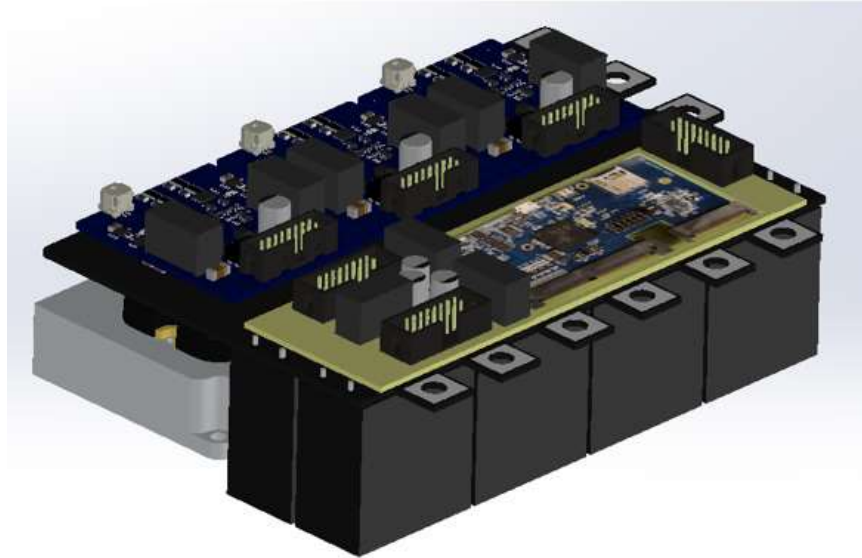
Initial System Design with Placement and Targeted Dimensions of Controller
